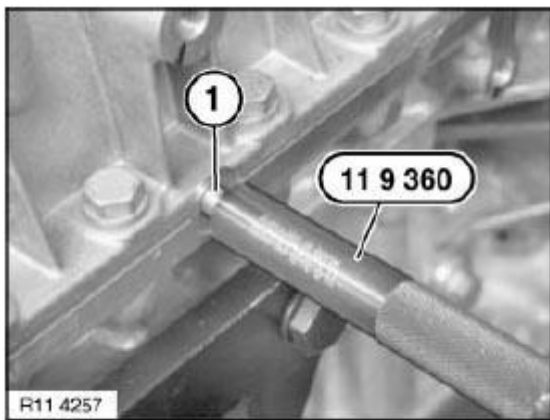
Driving In Both Nozzles With Special Tool 11 9 360 Into Crankcase
